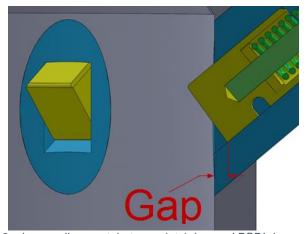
Lower alignment, between latch bar and BSDL inner surface.
